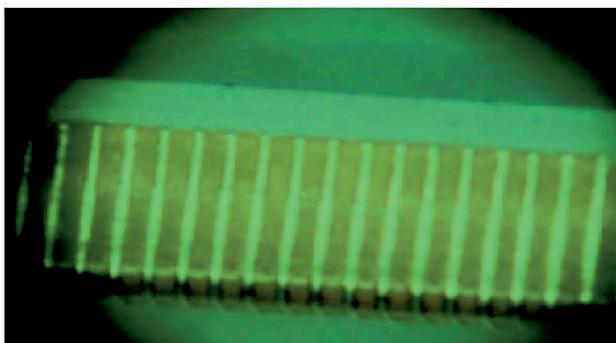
Top view of a 1mm wide elastomeric connector showing the conductors.
